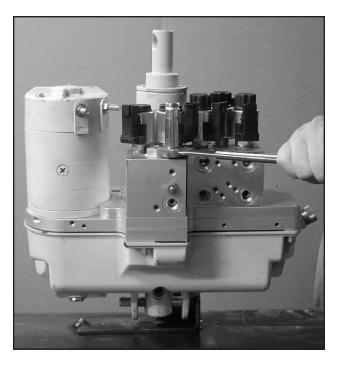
The "S1" Cartridge is removed using a 7/8" wrench or deep well socket.
